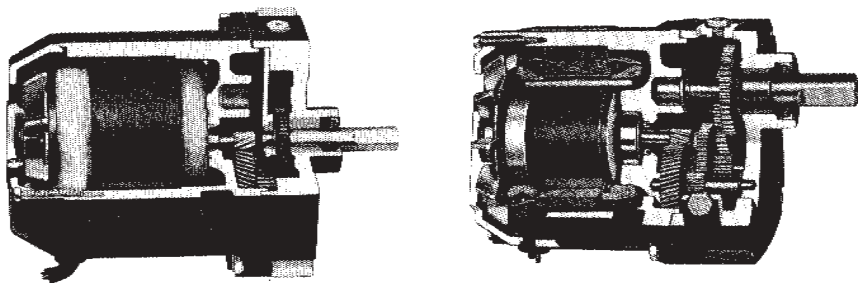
Comparison of parallel shaft gearmotors. On the left is an in-line shaft, on the right is an offset configuration.
